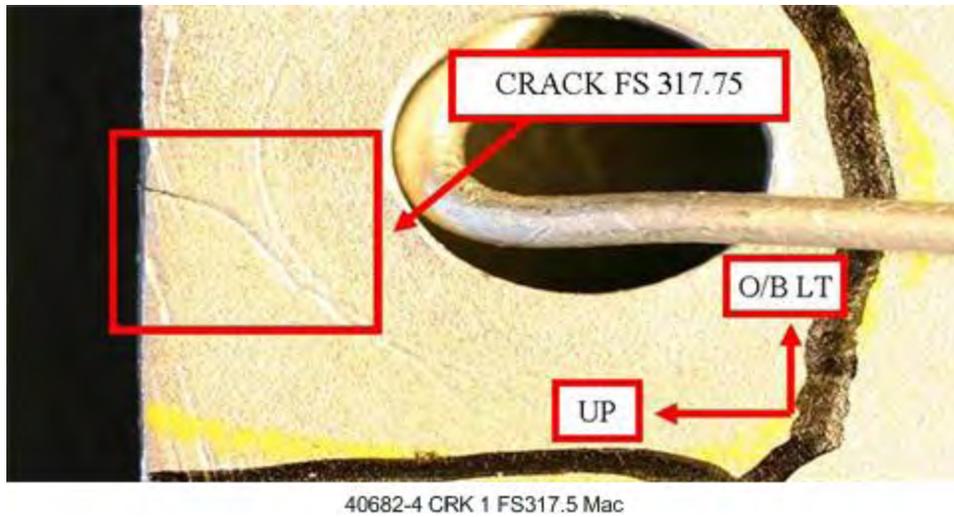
Macroscopic View of a Crack on the Aft Fuselage Bulkhead Assembly FS 317.75
